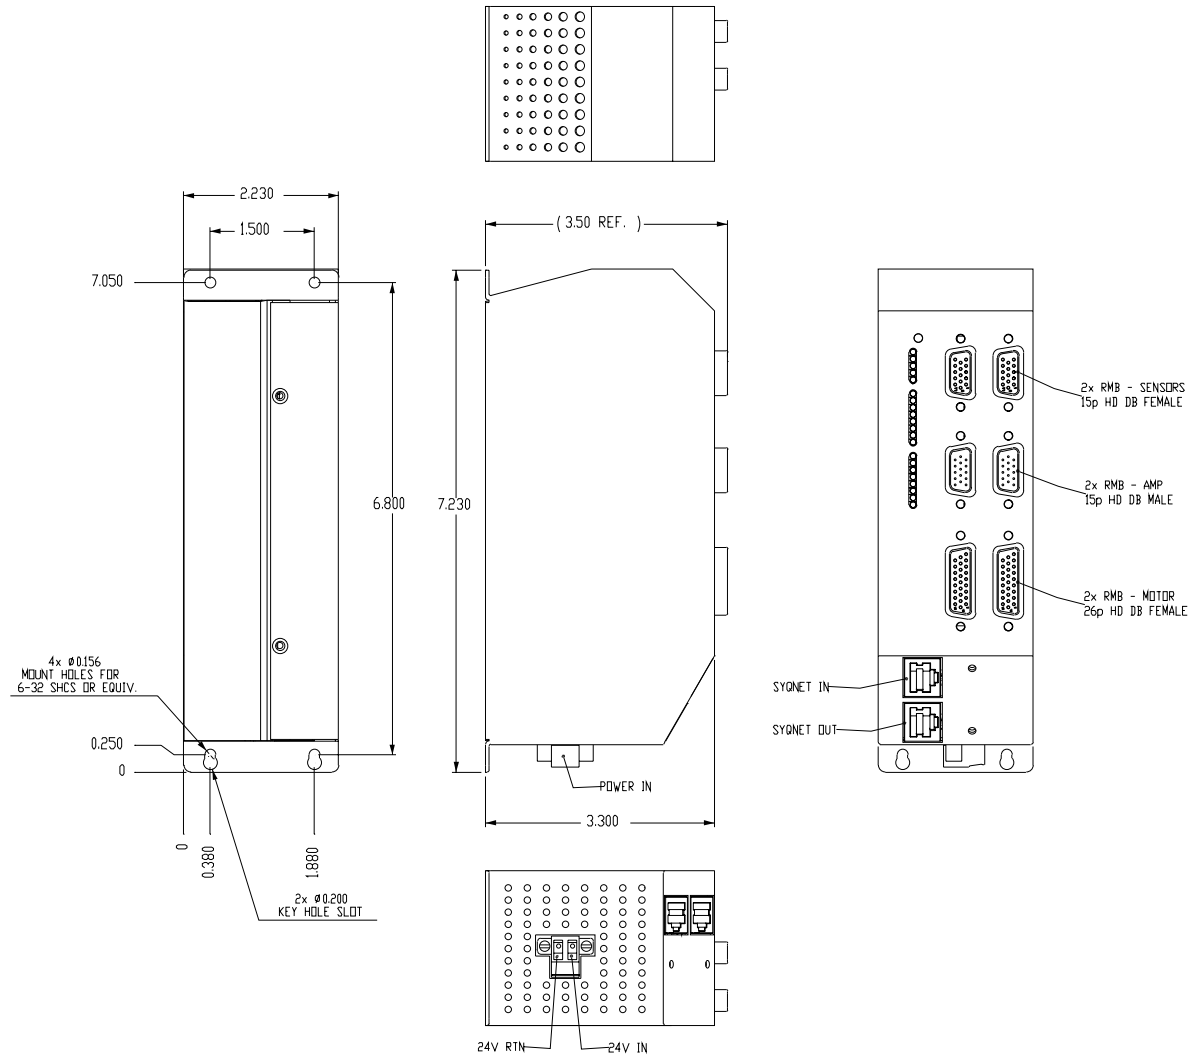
TA802 MECHANICAL DIMENSIONS
